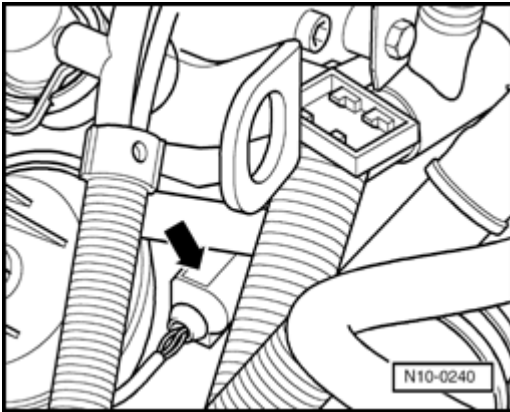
Locating Engine Coolant Temperature Sensor G62
